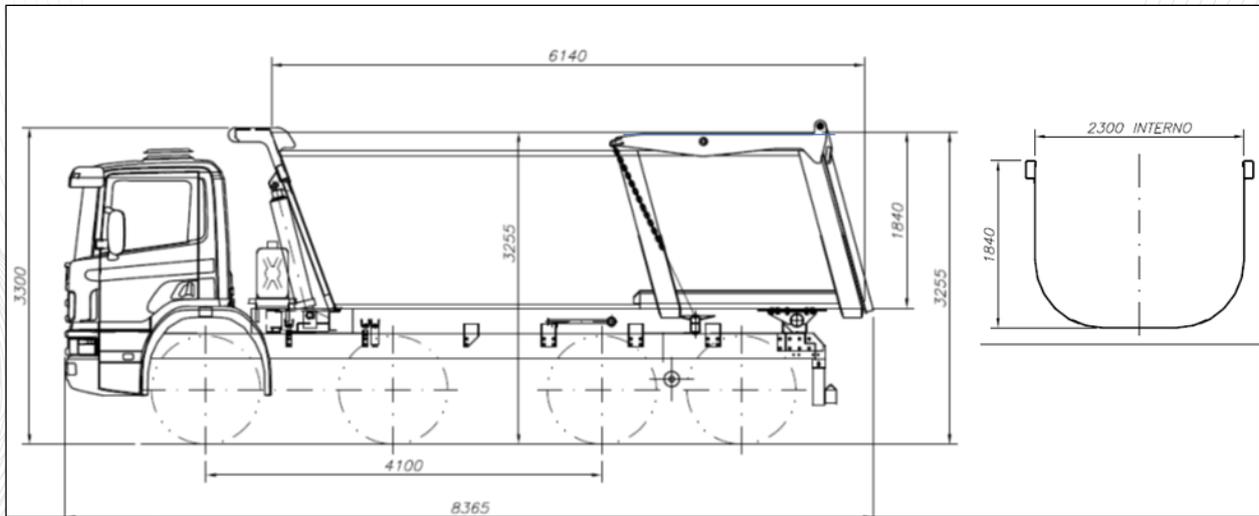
Schematic Drawing of the 8 x 4 Truck with typical Bucket for Rossetti Mining Operations.
